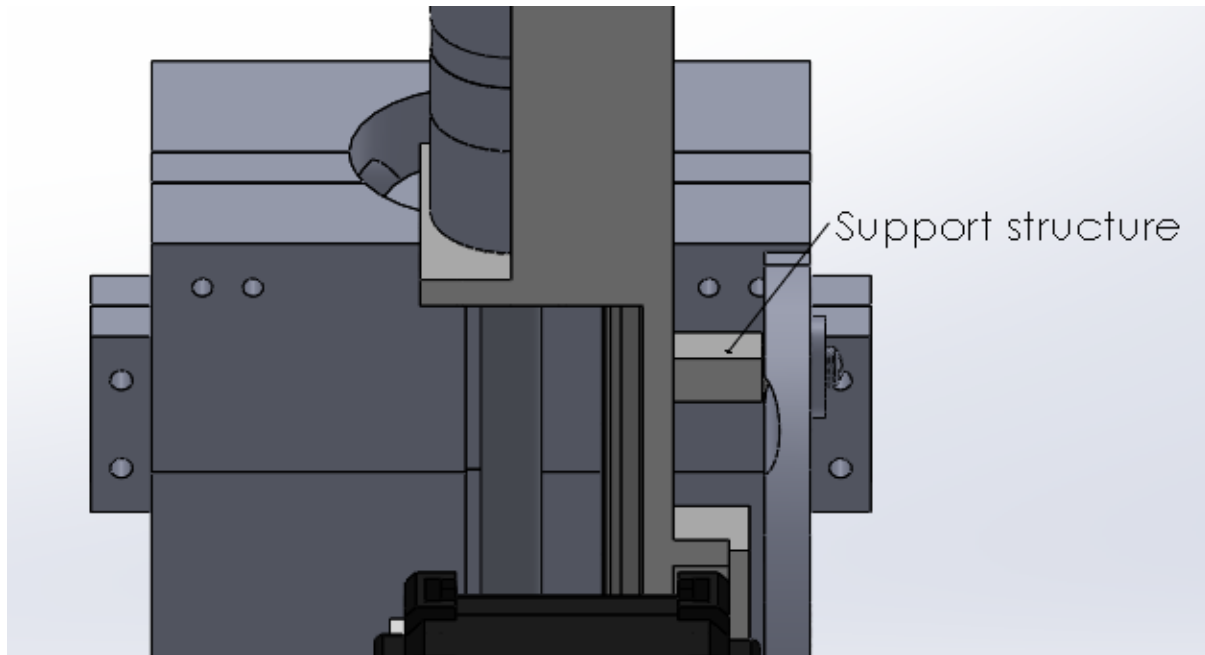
Side view of improved support between ultrasound probe and needle driving mechanism
